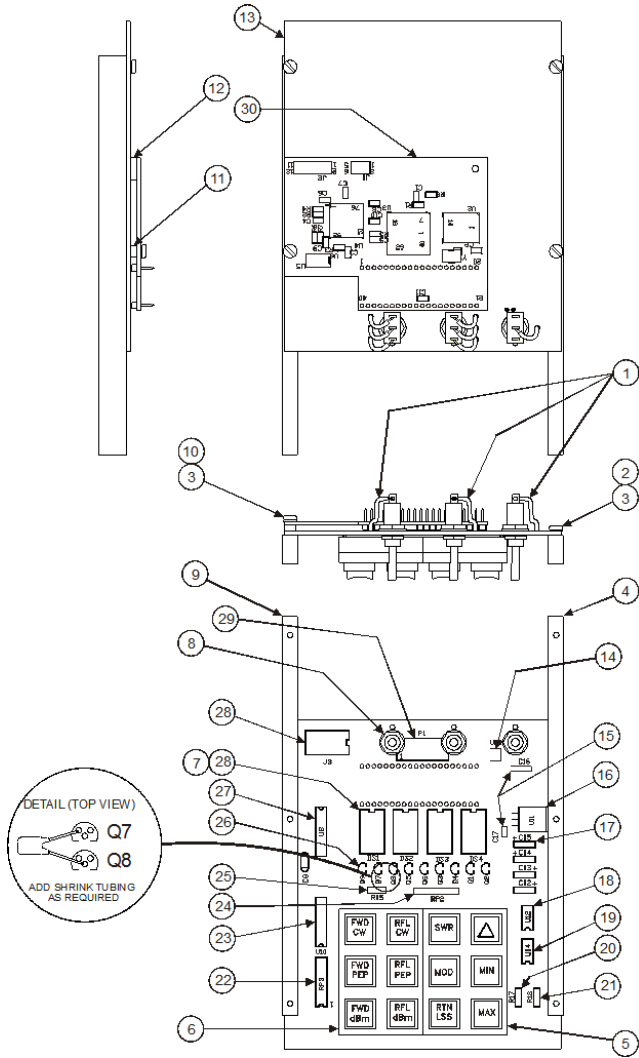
MCU PC Board Assembly (SN 074100062 and below)
